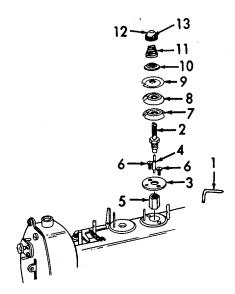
Rear Thread Tensioner and Thread Guide, Installation.
